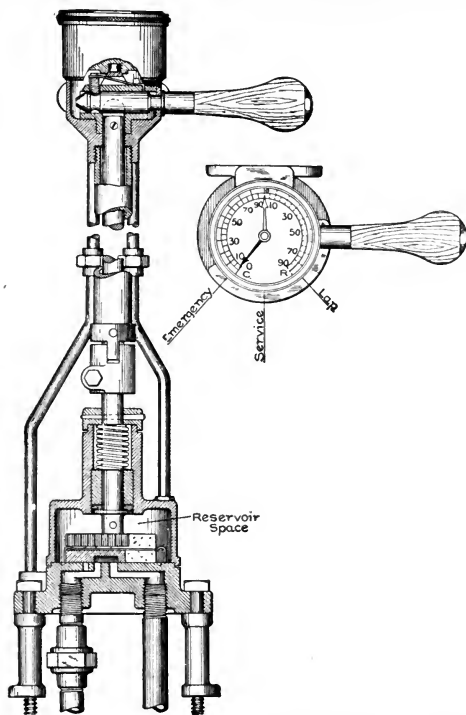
Type of Operating Valve with Handle and Valve Parts Separate. Westinghouse Straight Air-Brake System.
